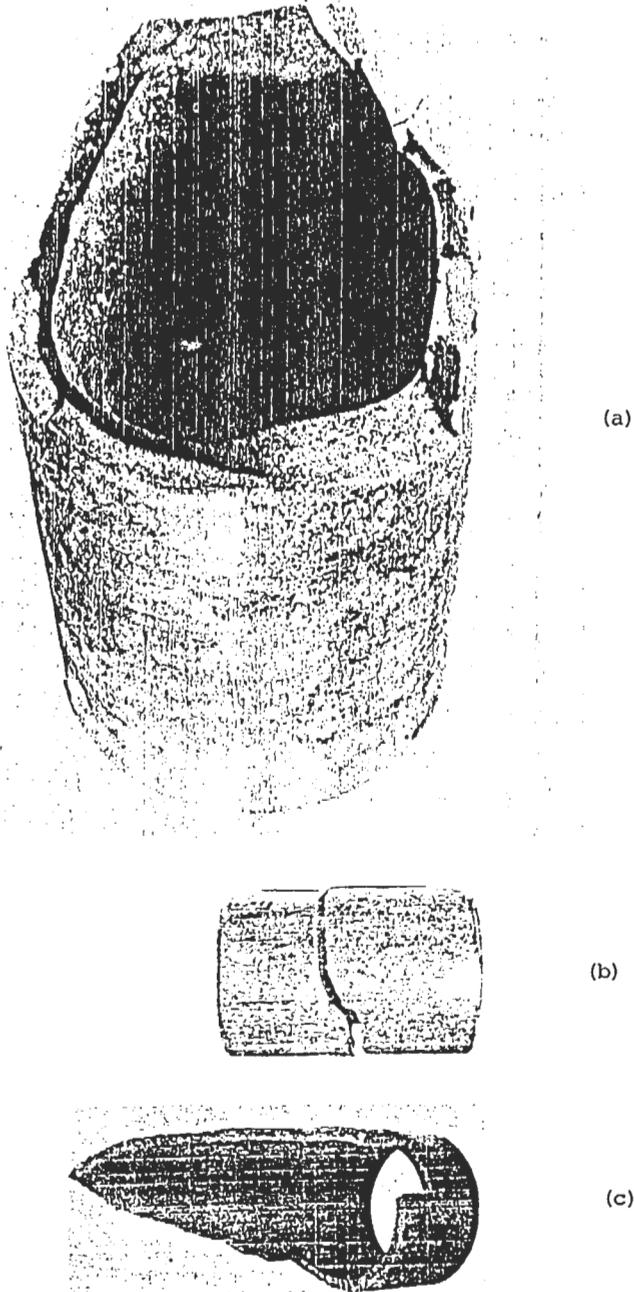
SSC failure, drillpipe (a); tubing failure (b); coupling (c). (From Refs. [184,218].)
